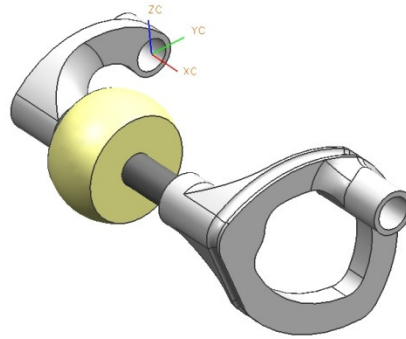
CAD model of the follower and roller assembly to be used with the external inverted cam design.
